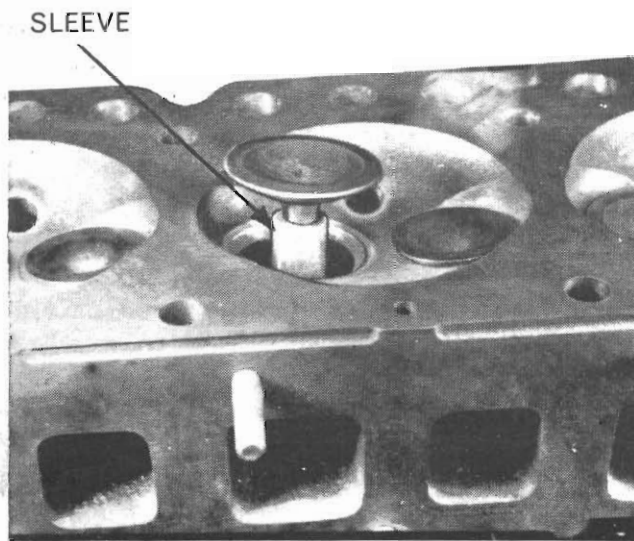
Installing valve guide wear checking sleeve E9C30B
